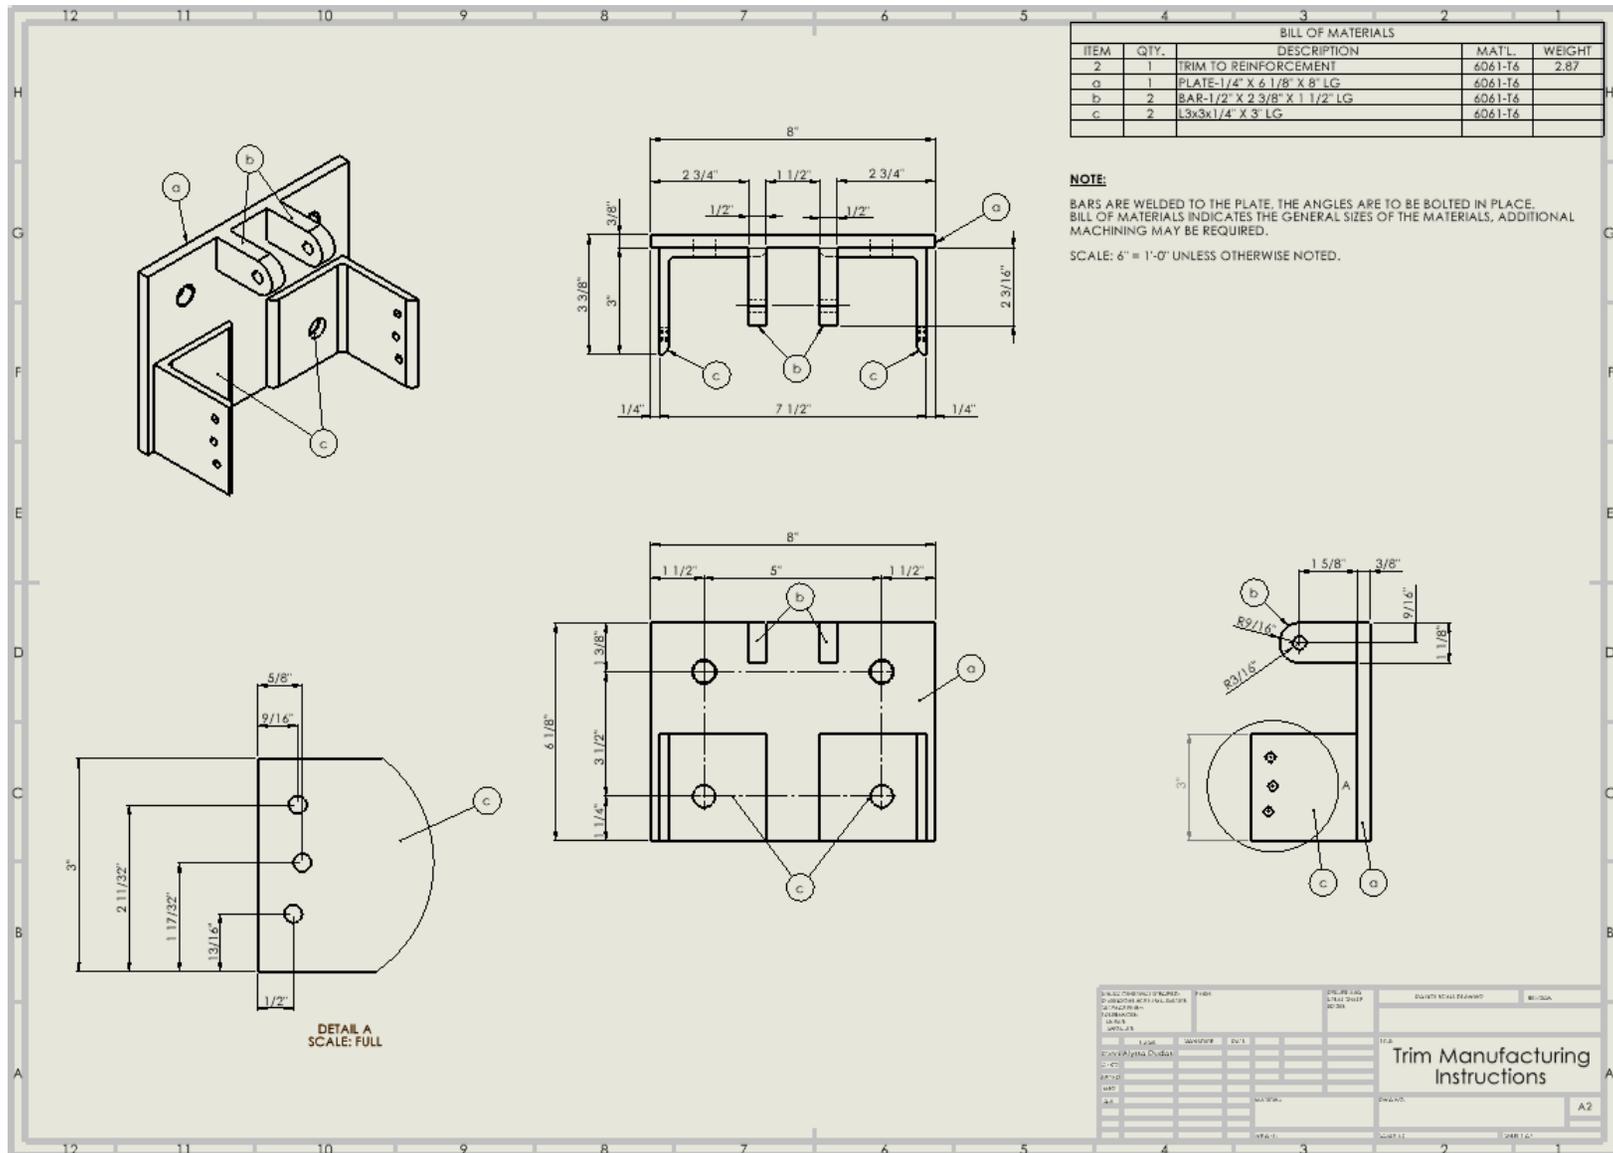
Fabrication Instruction Sheet for Trim Angle Adjuster That Bolts onto Hull
